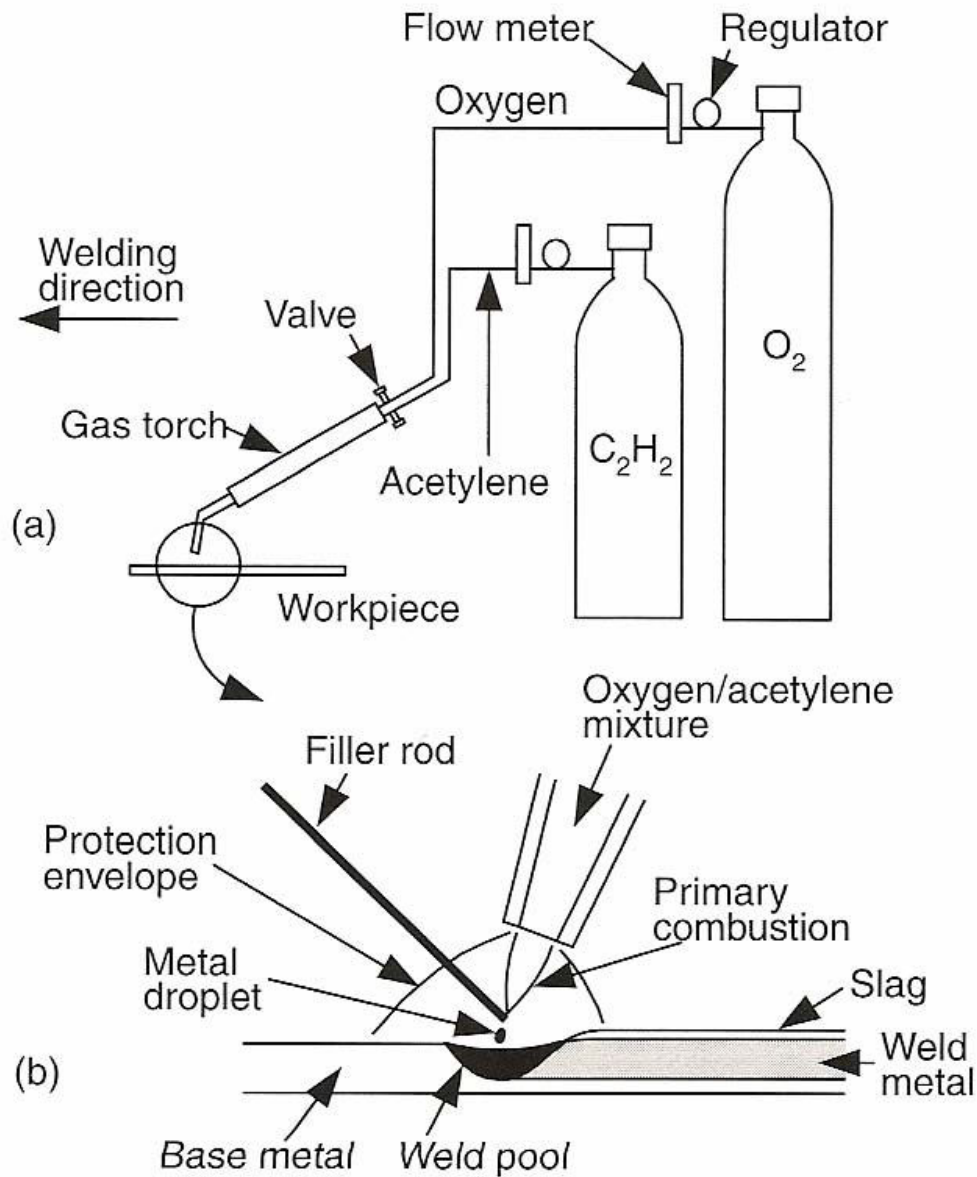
3: Oxyacetylene welding: a) overall process, b) welding area enlarged
